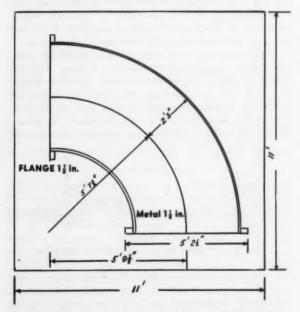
Flanged bend pipe to be made with skeleton pattern.
